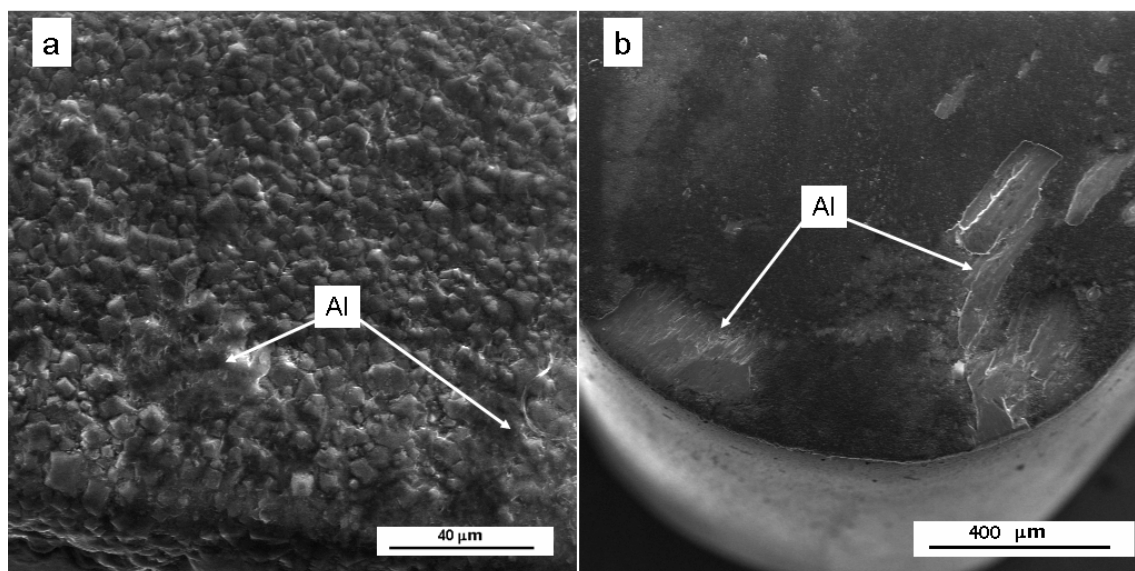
Image (SEM) of coated tool cutting edge after (a) 4 min and (b) 12 min machining.
